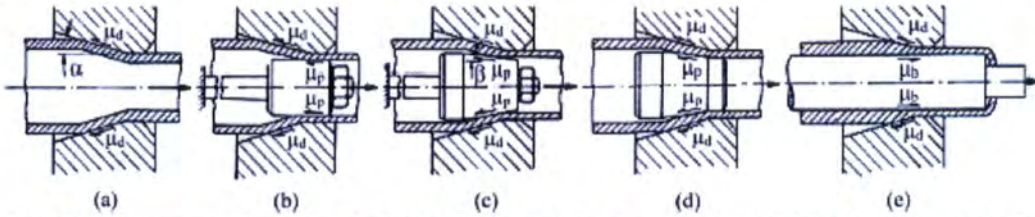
Tube drawing processes. a Tube sinking, b drawing with a fixed cylindrical plug, c drawing with fixed conical plug, d floating plug and e drawing on a bar (or mandrel). [8]
